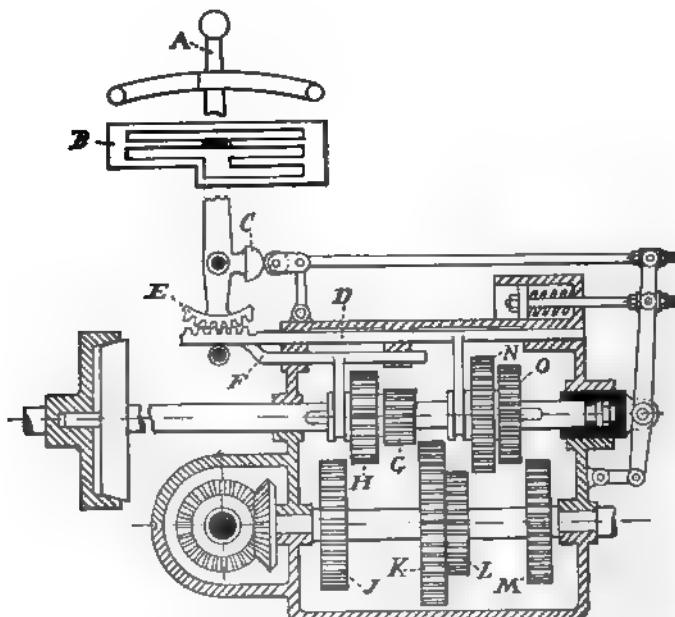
Transmission Gear of the Cannstadt-Daimler Carriage shown in the last figure. Here, A is the hand lever; B, the gridiron quadrant; C, a dog on the lever for throwing out the clutch in shifting the gears; E, toothed sector at end of A for actuating rack rods D and F (see next figure); G and H, low speed gears on the clutch shaft; J and K, low-speed gears on the second or driving shaft; N and O, high-speed gears on the clutch shaft; L and M, high-speed gears on the second shaft. H and G are shifted on square portion of shaft by rack, F; N and O by rack, D.
